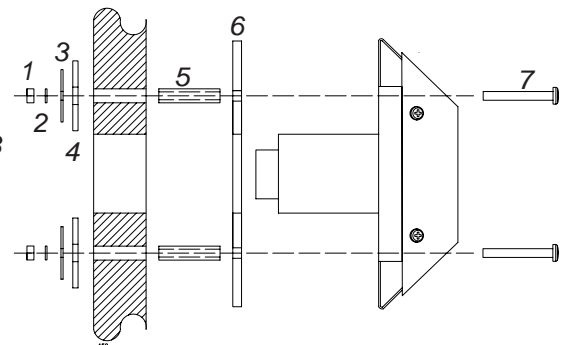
Sealable lead-through. With adapter 2462 the lead-through 2460 can be installed to an old, larger opening.
